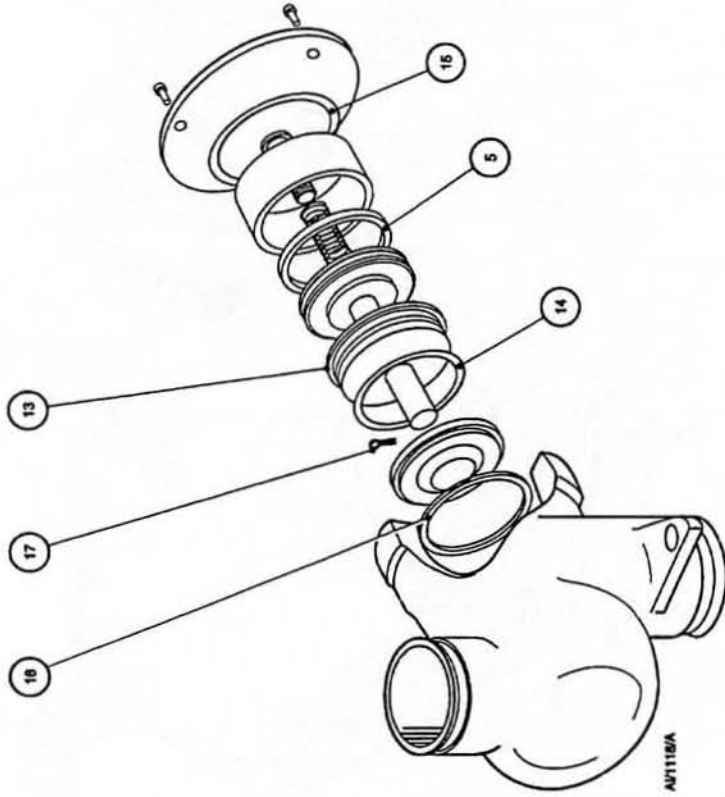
Kit items for oil box end-plate and oil filter sub-assembly
